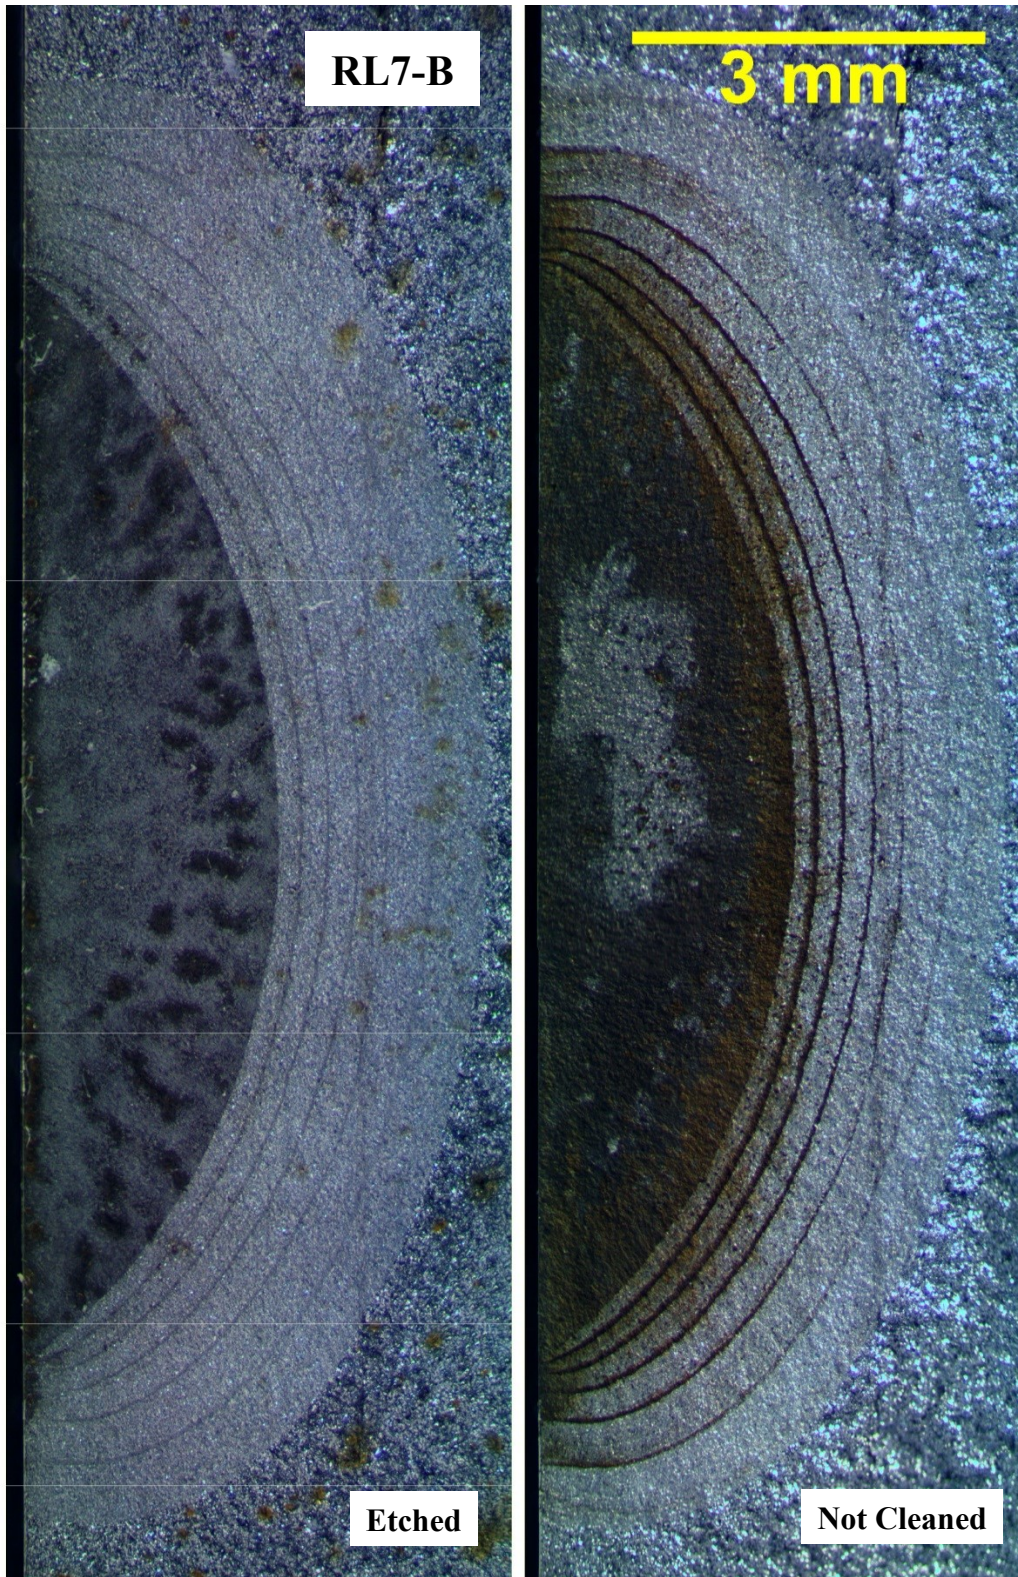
Fractograph for RL7-B. Imaged with a stereomicroscope. On the left is an etched fracture surface. On the right is a fracture surface that has not undergone cleaning.
